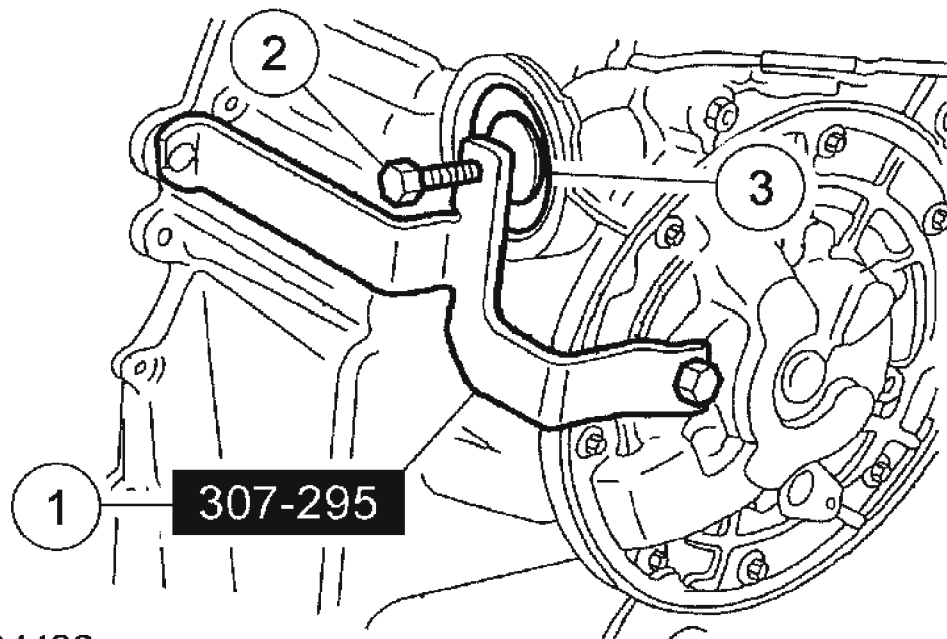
Removing Thermostatic Fluid Level Control Valve
